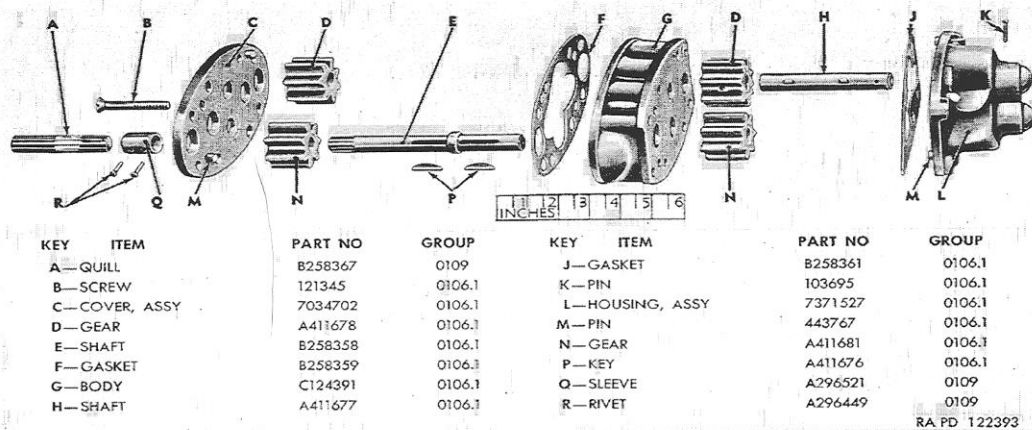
Engine oil pump (C124400), current type, exploded view.
